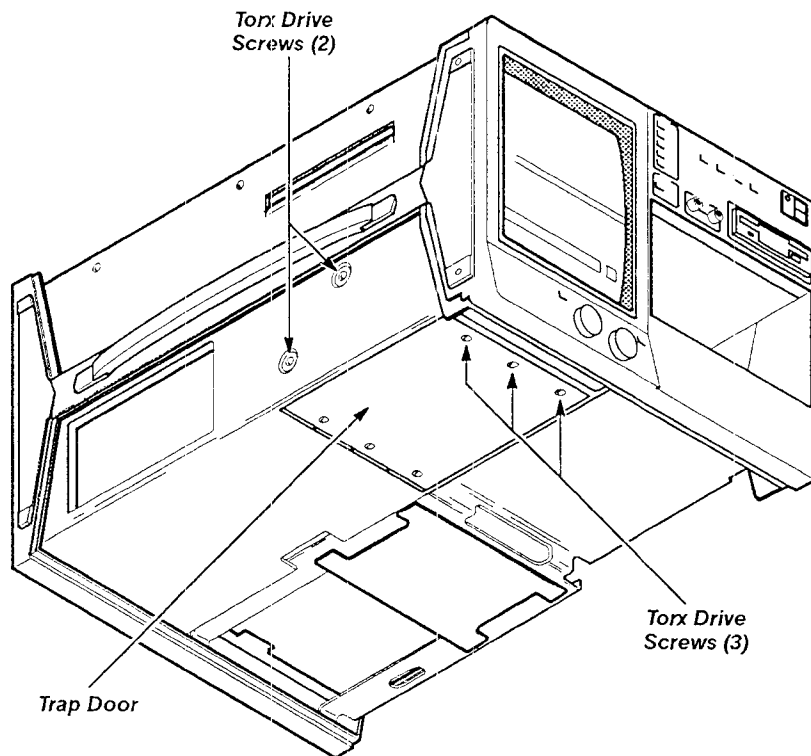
Removing/Replacing the Trap Door Torx Drive Screws
